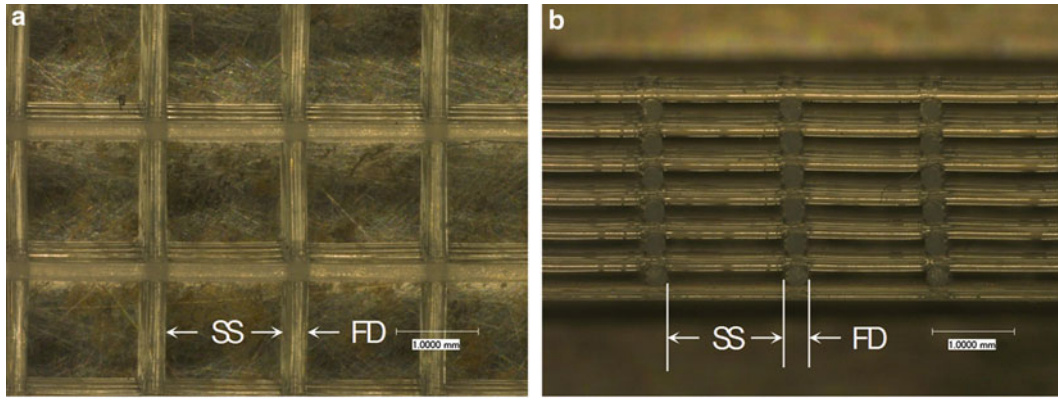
3D printed foam pad with BCC cell structure. (a) Top view (b) Side view
